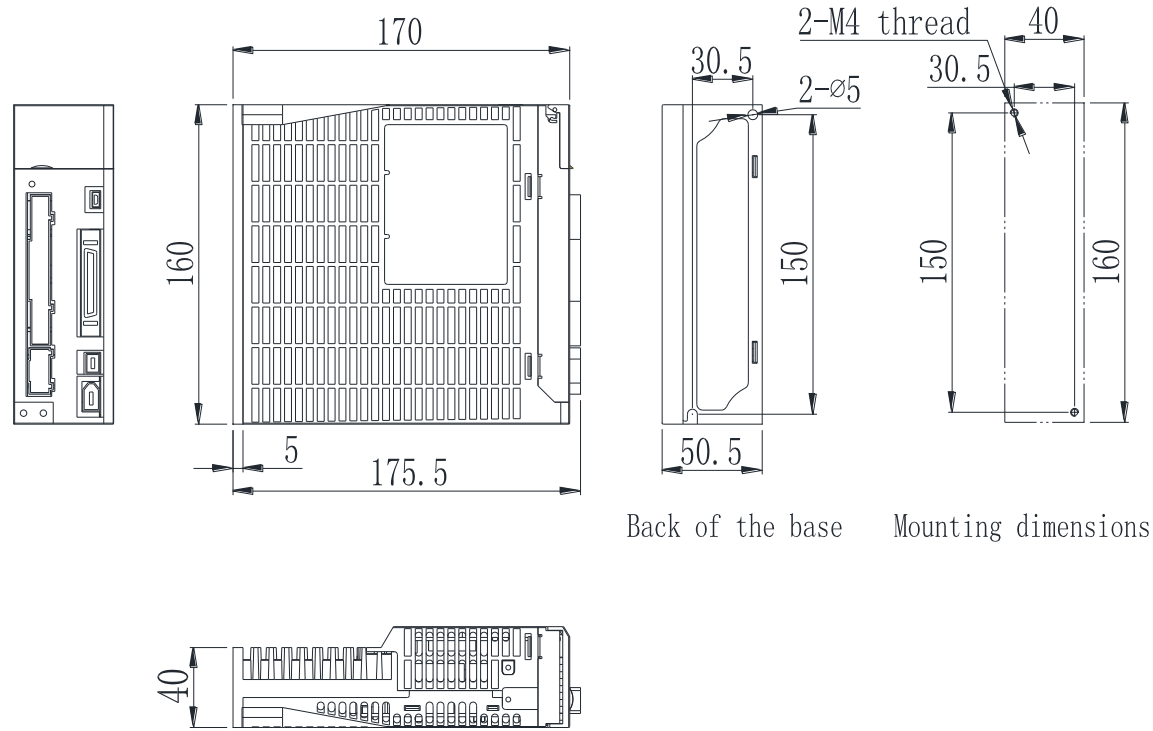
Dimensional drawing of driver WSDV-2R8
